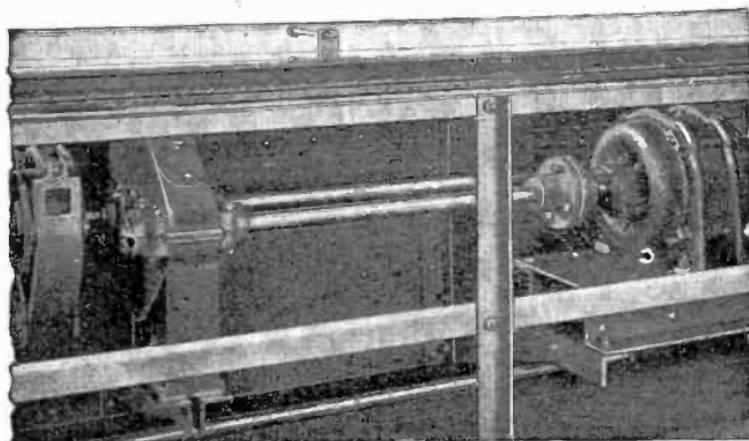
,880.—*Euclid crane construction 7. Bridge drive mechanism.* The illustration also shows the motor mounting between the bridge motor and the gear housing.
